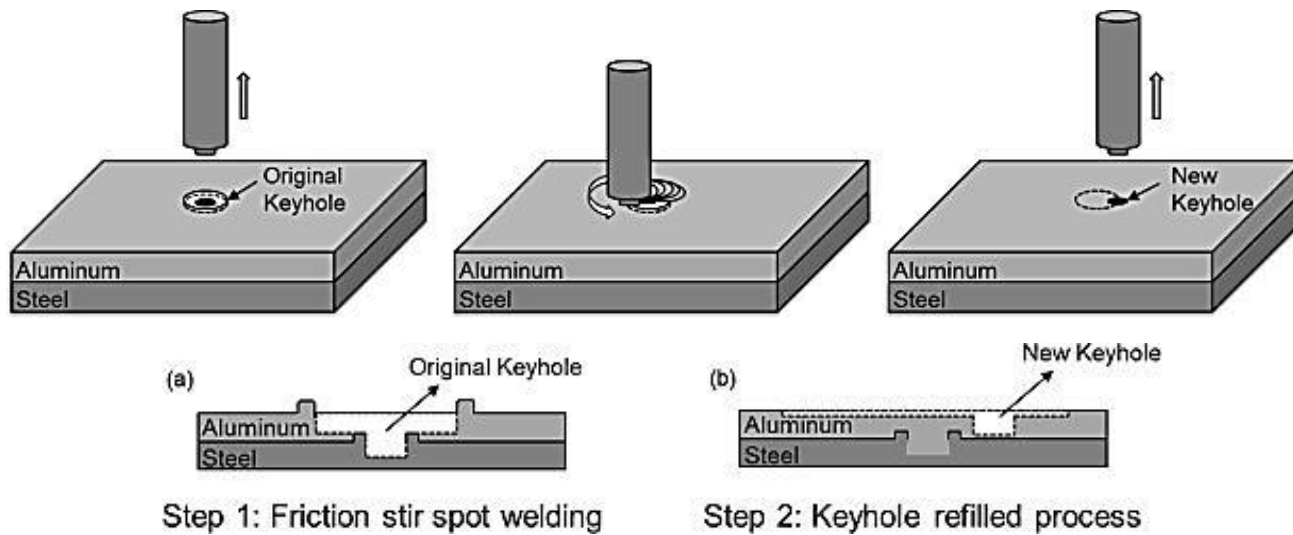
A keyhole refilled Friction Stir Spot Welding (FSSW) (Chen, Liu, and Ni 2017)
